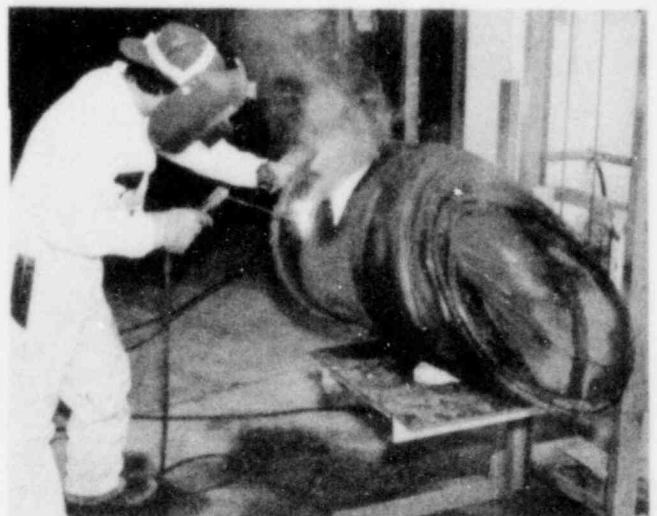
Disassembly of Top-Corner-Impacted PAT-1
